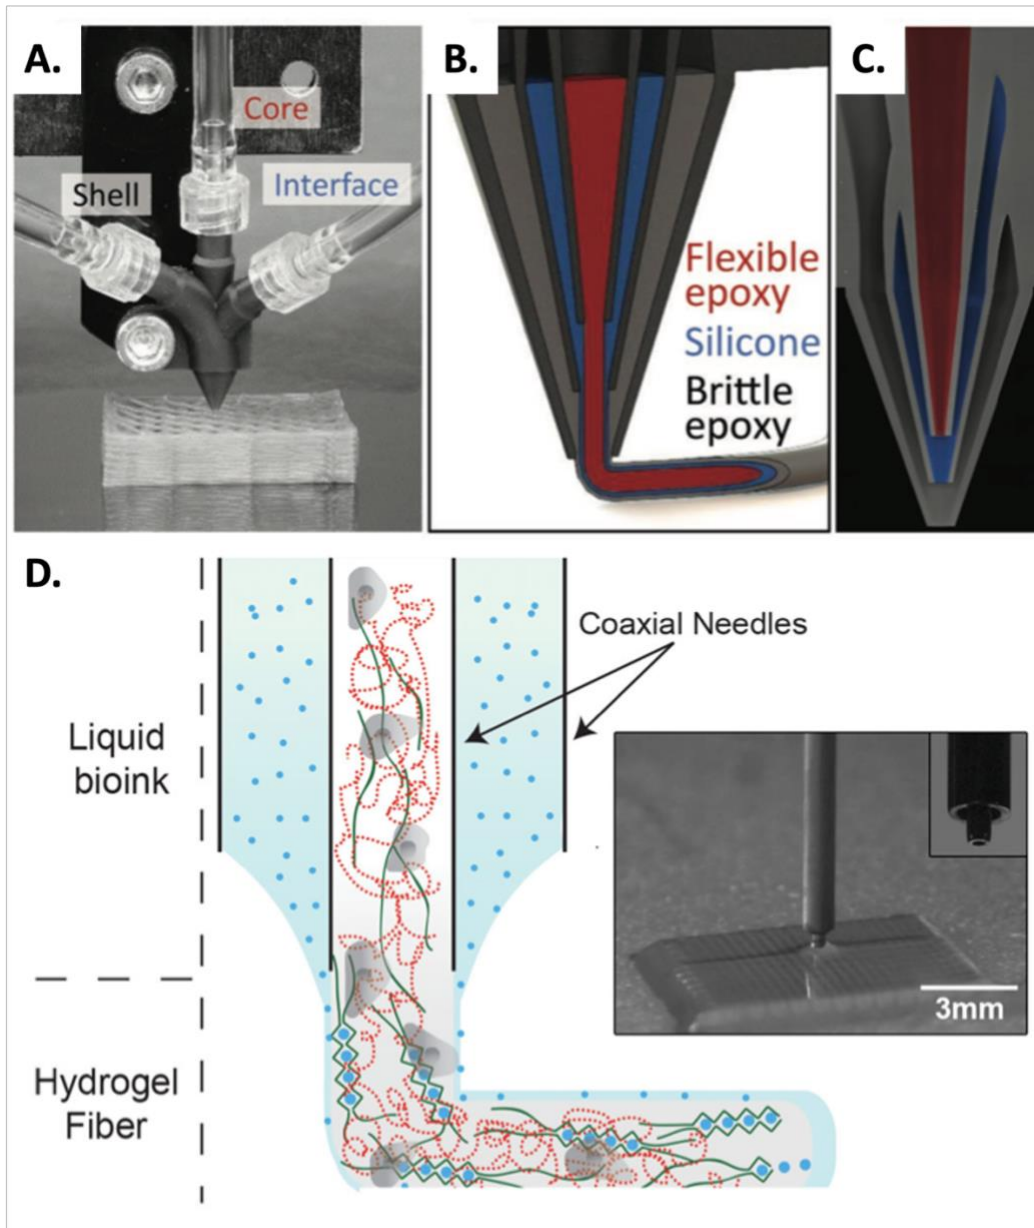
Extrusion printing of core-shell filaments using coaxial nozzles. (A) Extrusion printing of lattice structures using multicore-shell filaments (B) Sectional view multicore-shell filaments (C) Sectional view of the coaxial nozzle<sup>30</sup>. Reproduced with permission from Adv. Mater. 30, 12 (2018). Copyright 2018 WILEY-VCH Verlag GmbH & Co. KGaA, Weinheim. (D) Bioprinting of alginate bioinks using coaxial streams of alginate pre-gel and crosslinker<sup>31</sup>. Reproduced with permission from Adv. Mater. 28, 4 (2015). Copyright 2015 WILEY-VCH Verlag GmbH & Co. KGaA, Weinheim.
